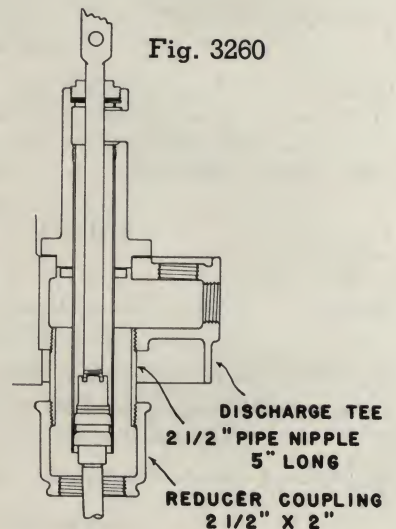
shows the method of reducing the suction tapping for a drop pipe size less than 2 1/2". This method must be used to give the proper clearance for the extended plunger tube. The nipple and reducer coupling are furnished as regular equipment.
